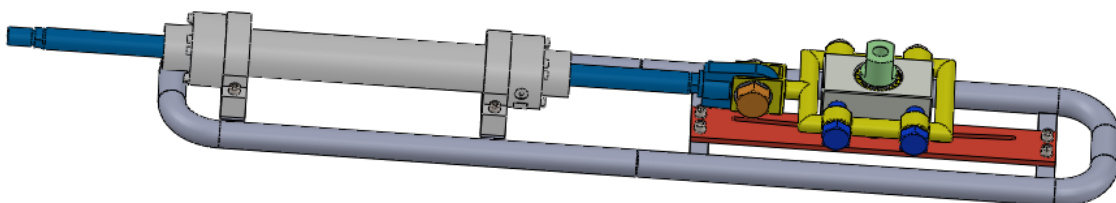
Kinematic mechanism of tilting joint powered hydraulically
